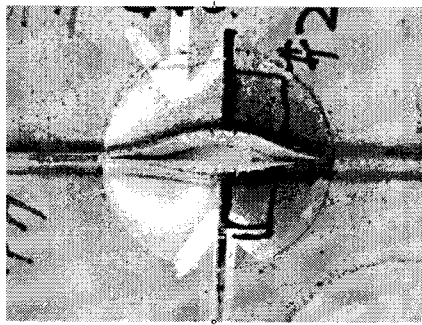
Fracture mode of the dissimilar laser welded joint of high Mn steel and 780TRIP steel.
